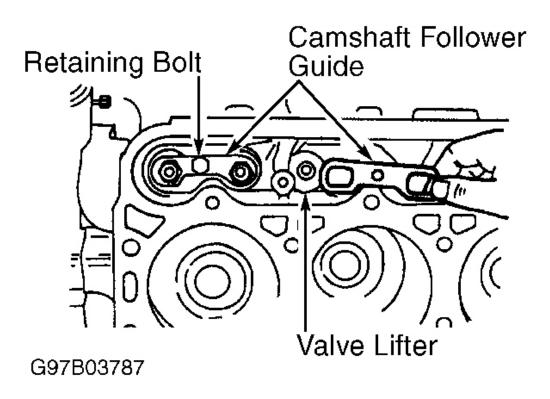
Locating Camshaft Follower Guide Courtesy of FORD MOTOR CO.
